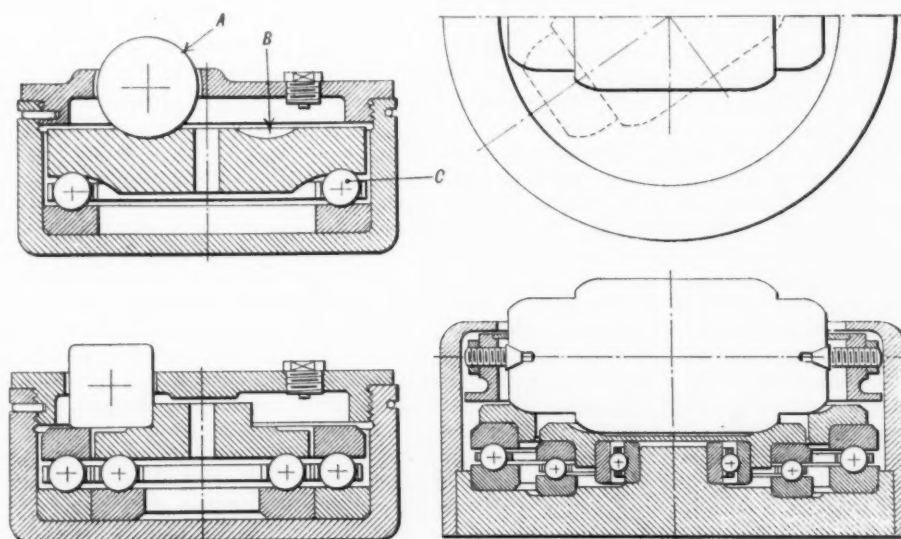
BALL AND ROLLER BEARINGS FOR SLIDING MECHANISMS
